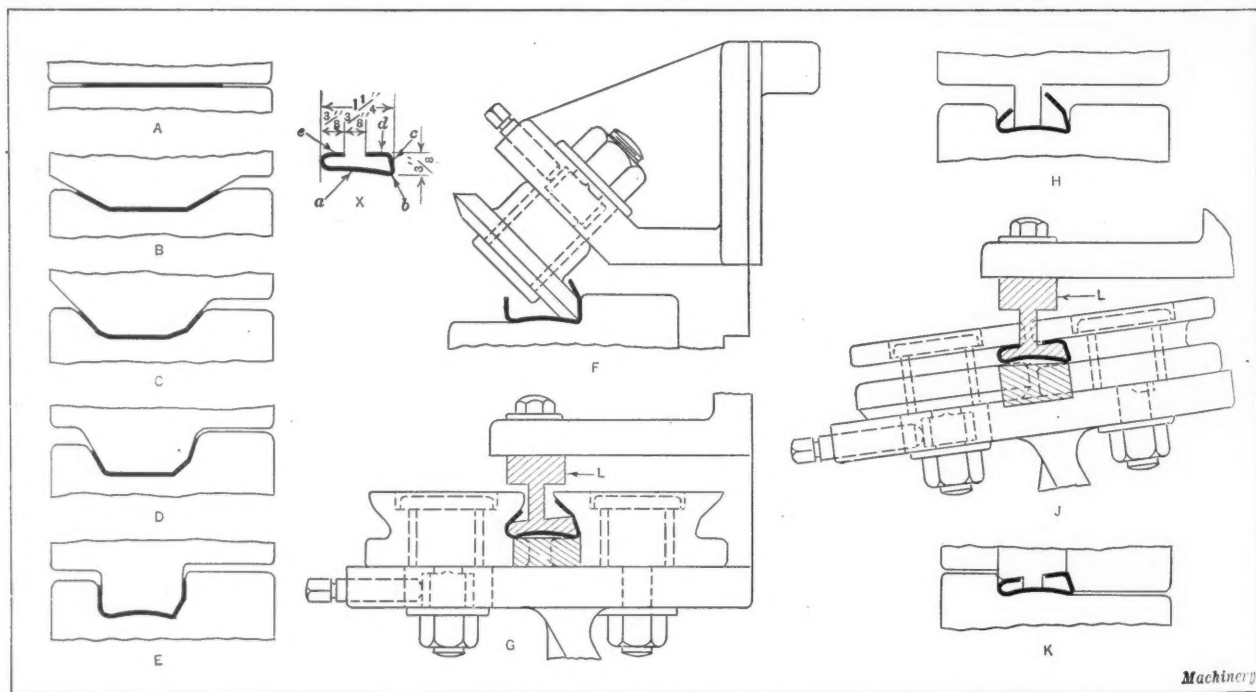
Rolls employed in producing a Section that requires the Use of Mandrels to maintain the Inside Dimensions
